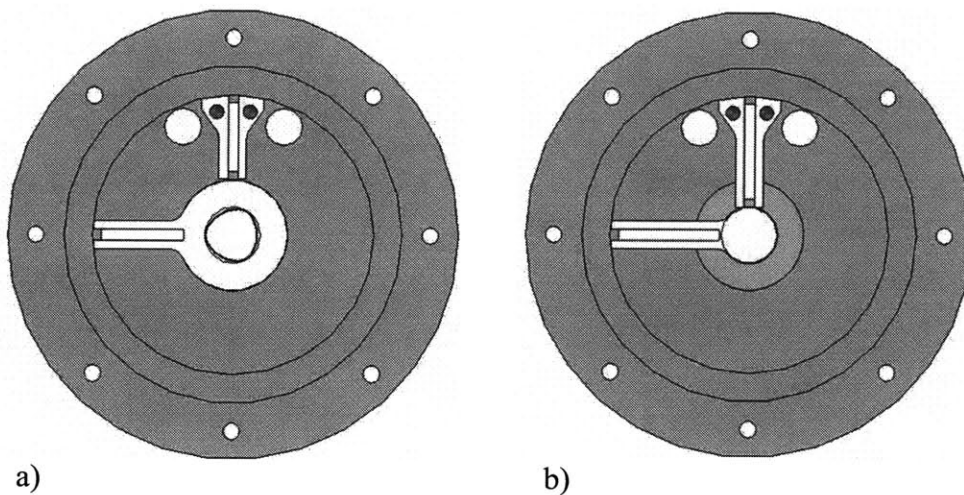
Motor with, a) face and shaft seal, and b) only shaft seal
